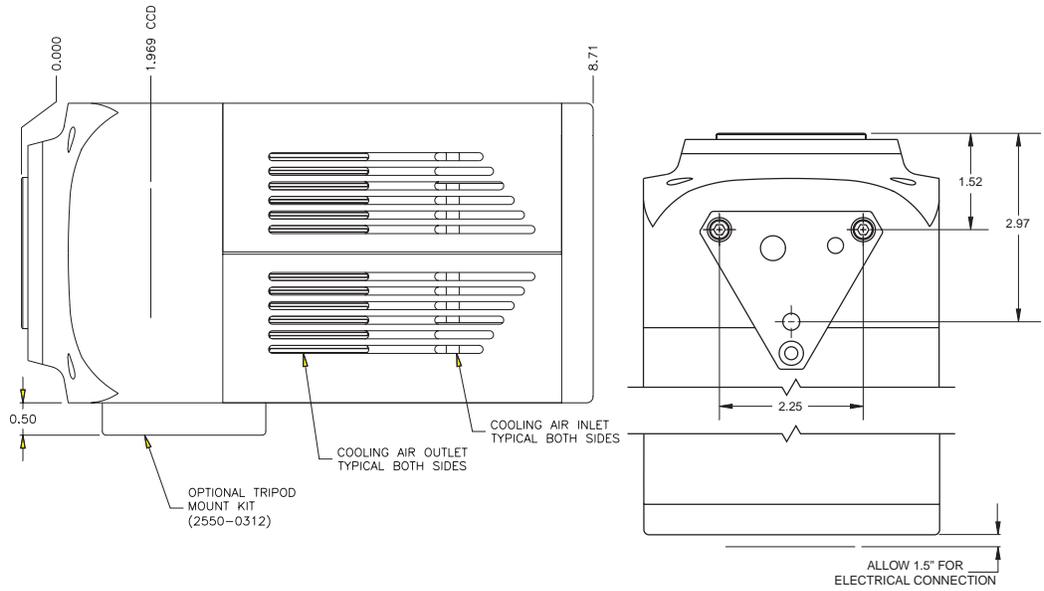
Fiber Optic Coupled: Side and Bottom Views
